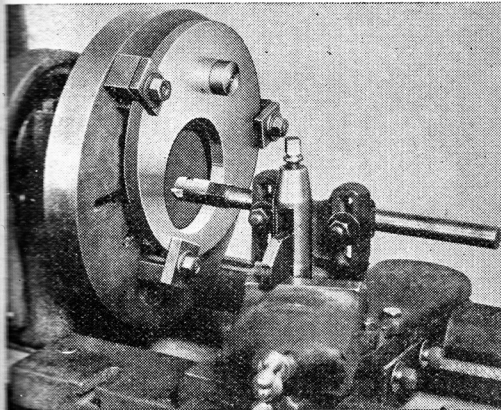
Boring an eccentric hole on the face plate of a lathe.
